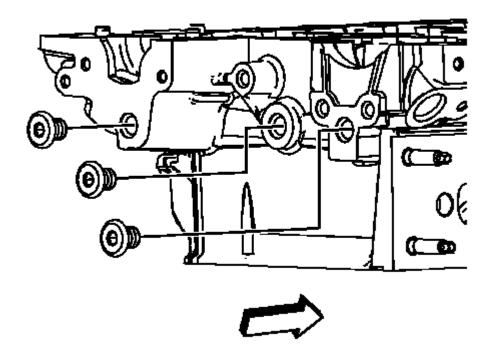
Cylinder Head Plugs Courtesy of GENERAL MOTORS COMPANY
